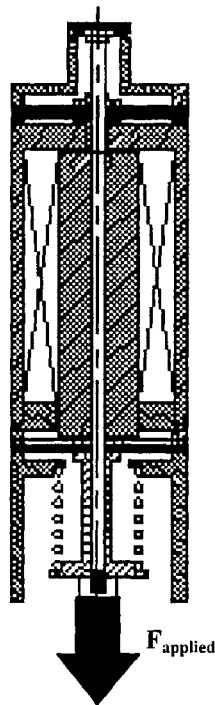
Cross-sectional view of valve loading for testing purposes
